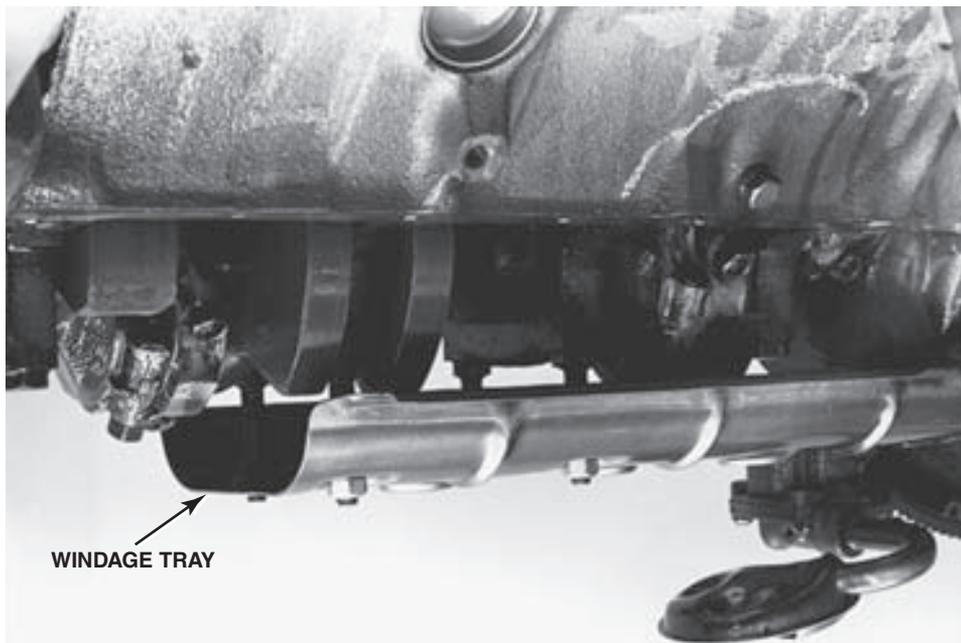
Windage tray attached between the crankshaft and the oil pan.
